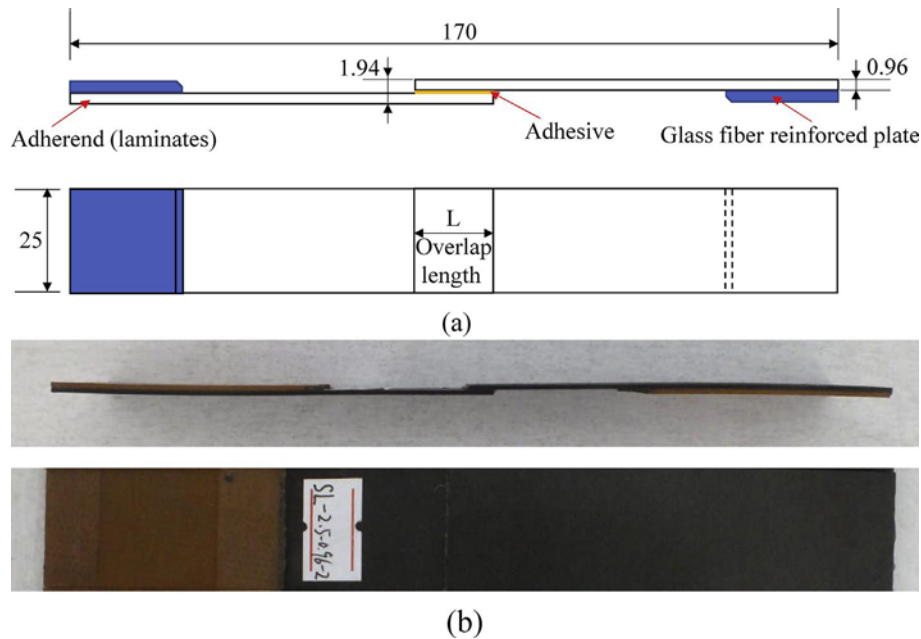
Geometry of test specimens (unit: mm): (a) Diagram of specimens; (b) Photograph of specimens.
